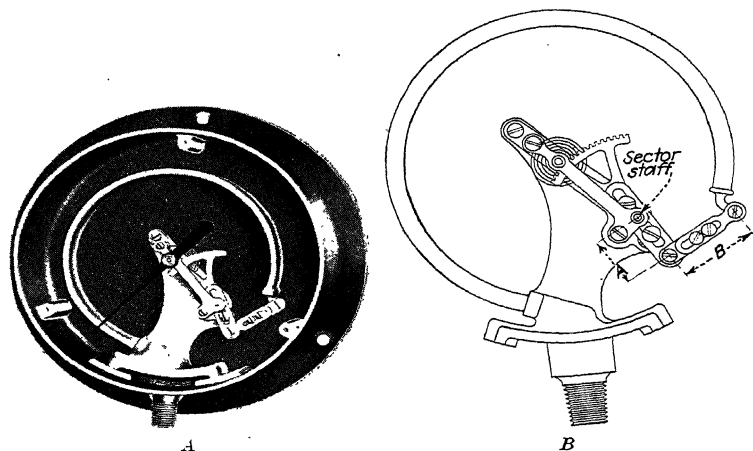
Bourdon-tube pressure gauge. (Courtesy of Crosby Steam Gage & Valve Company.)
